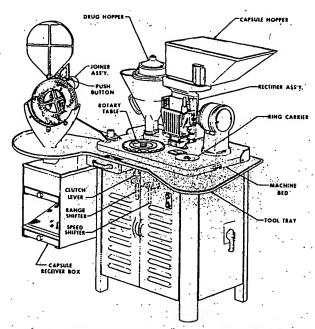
Schematic of Type 8 capsule-filling machine (courtesy, Parke-Davis).
